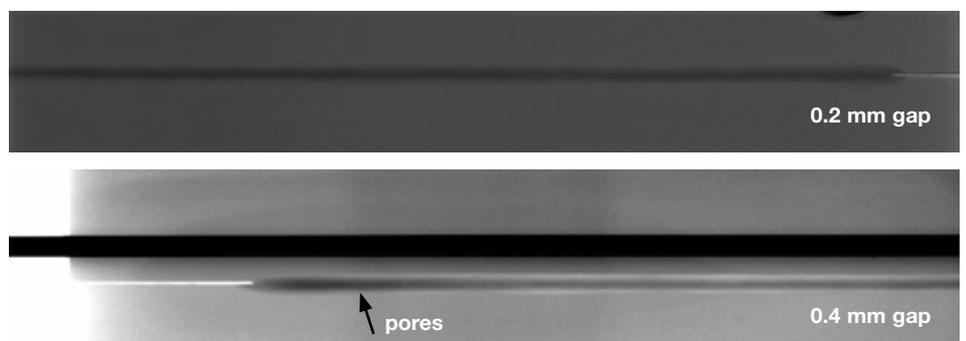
X-ray images of the welded joints; with 0.2mm gap (top) and 0.4mm gap (lower)
